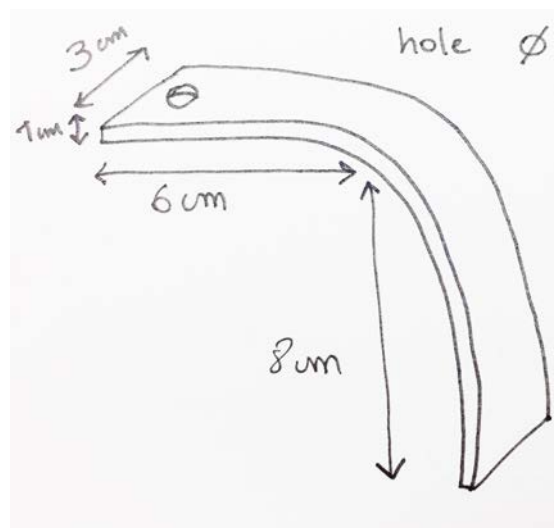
Final sketch of the "HESS" prototype (the shoulders hooks)
